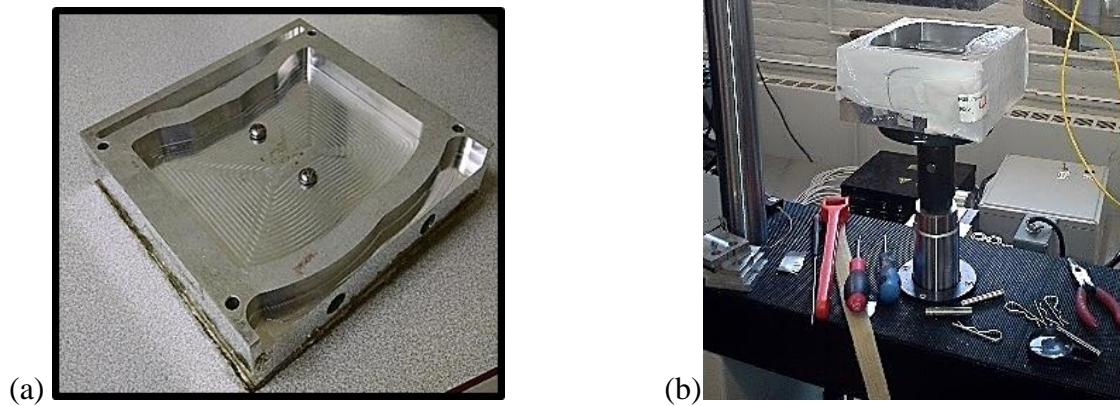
(a) Machined press surface, (b) Press and base attached to Instron load frame.
